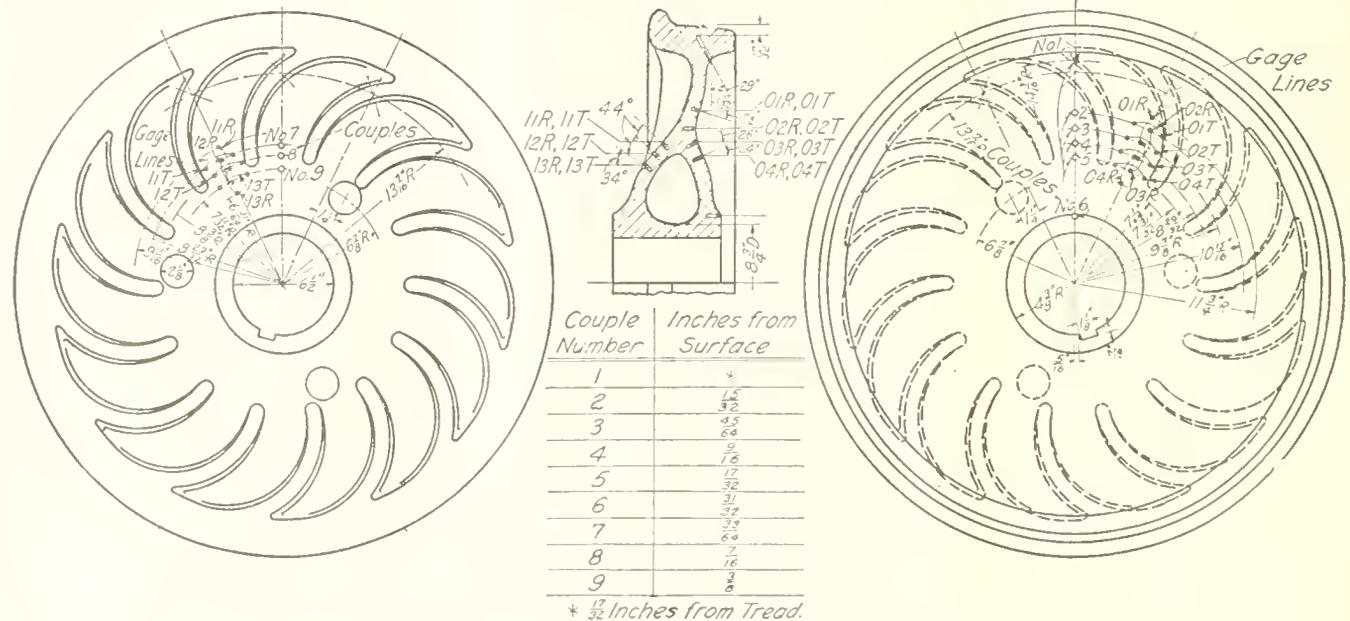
Location of Gauge Lines and Thermocouples. 33 inch, 625 lb. Wheel
